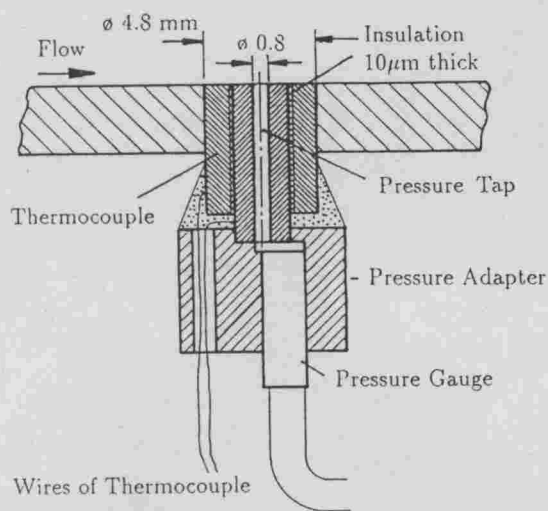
Coaxial thermocouple with integrated pressure gauge
